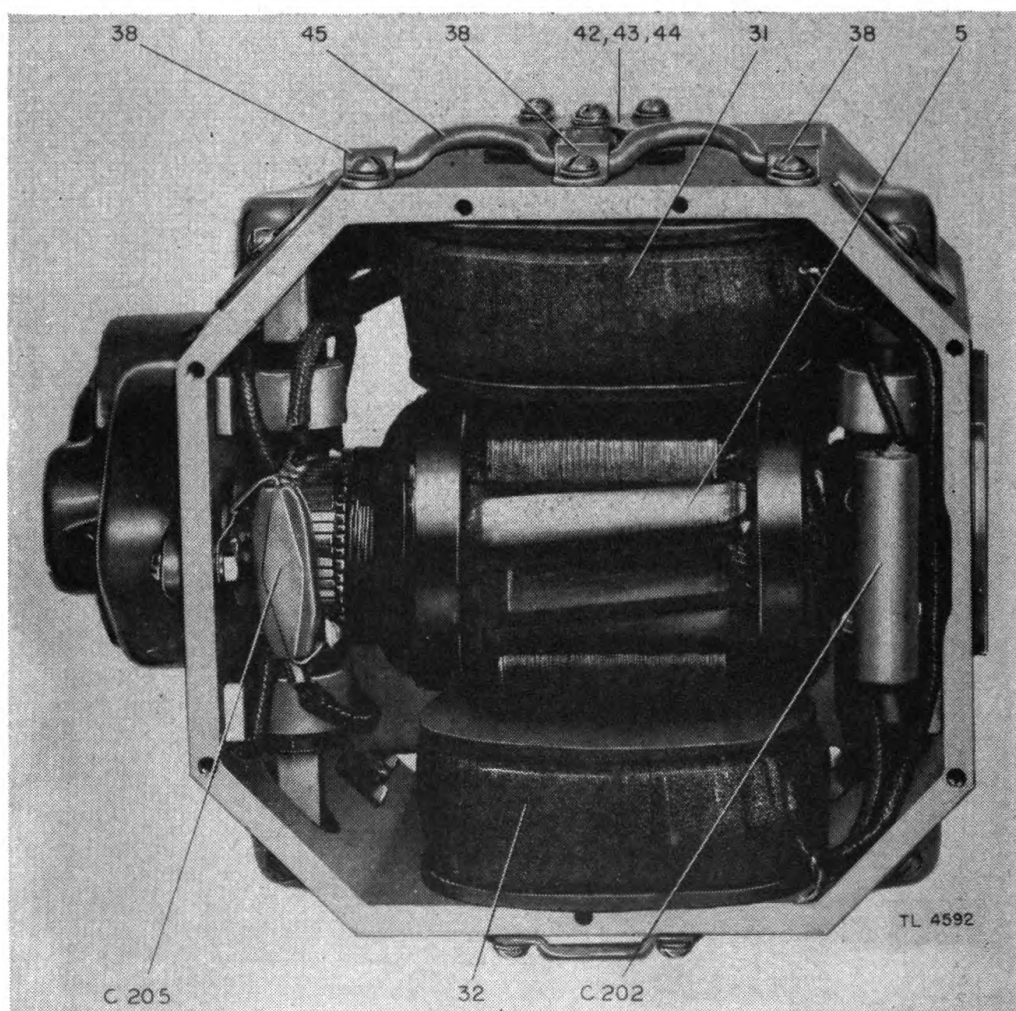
Generator GN-44-A, bottom plate removed—bottom view.
